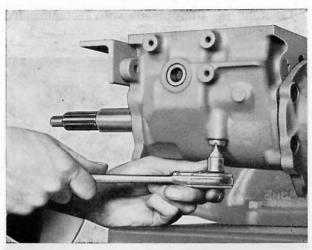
Removing a screw retaining a striking fork rod locking ball and spring
